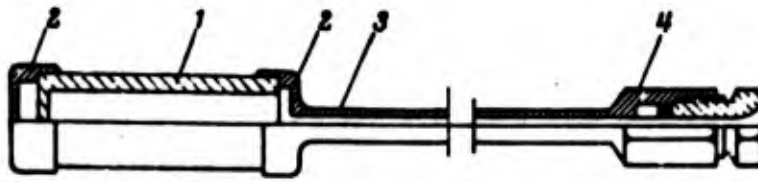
Cylindrical sound receiver with a radially polarized sensing element and rigid bracing 1) cylindrical piezoelement; 2) metallic cups; 3) tube-holder; 4) connecting coupling.
